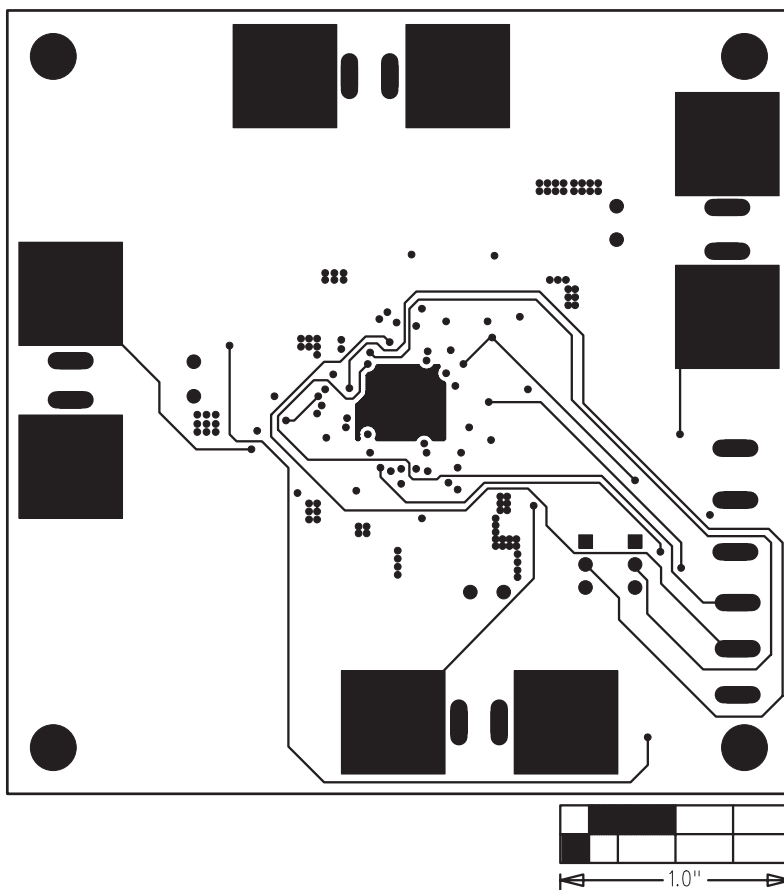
MAX15003 EV Kit PCB Layout—Layer 3 (Power Layer)
